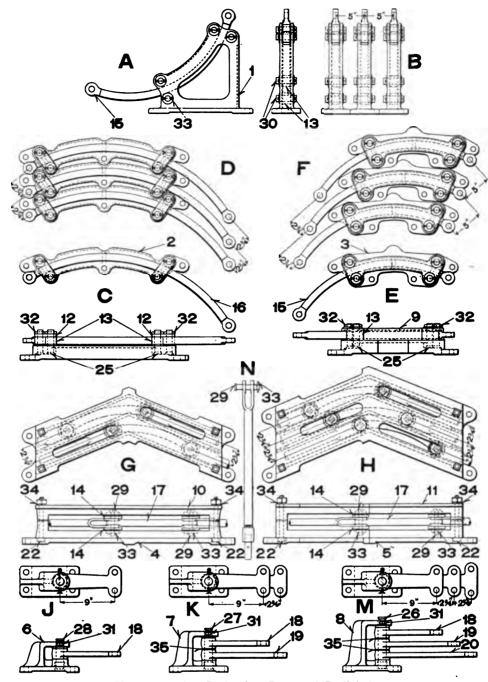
Details of Transverse Pipe Carrier. New York Central & Hudson River.
